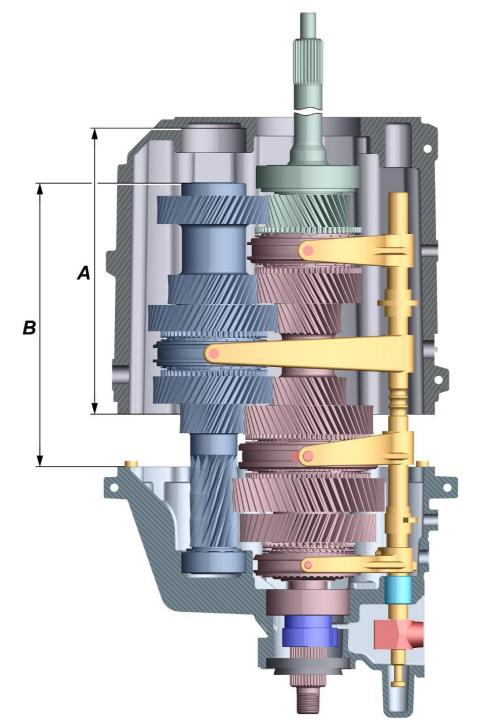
Countershaft bearing adjustment ring thickness determination diagram
